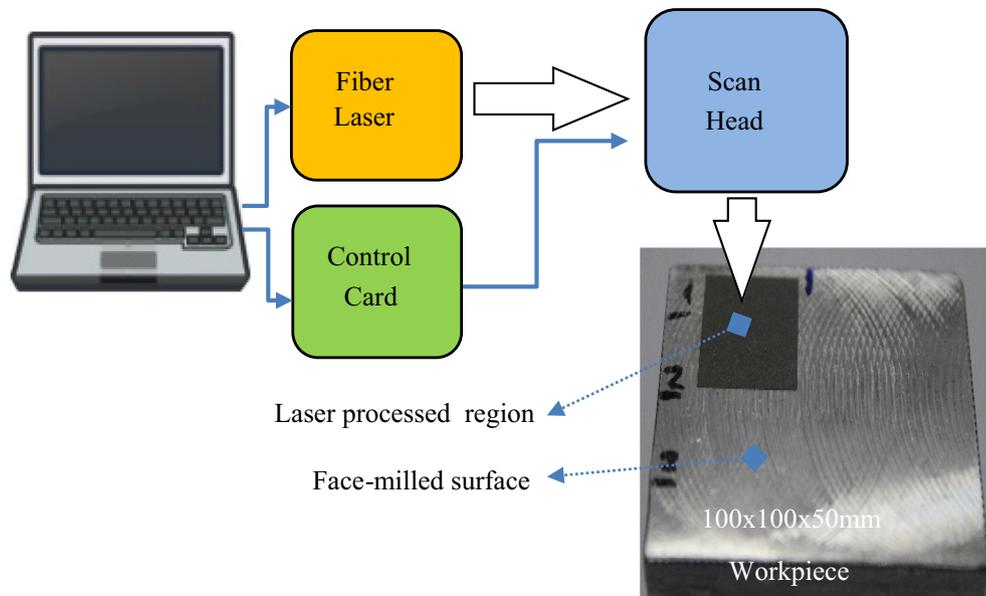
Visual illustration of the experimental set-up, where the scan head is used to move the laser beam on the face-milled aluminum surface and control card is used to control two motors in the scan head.
